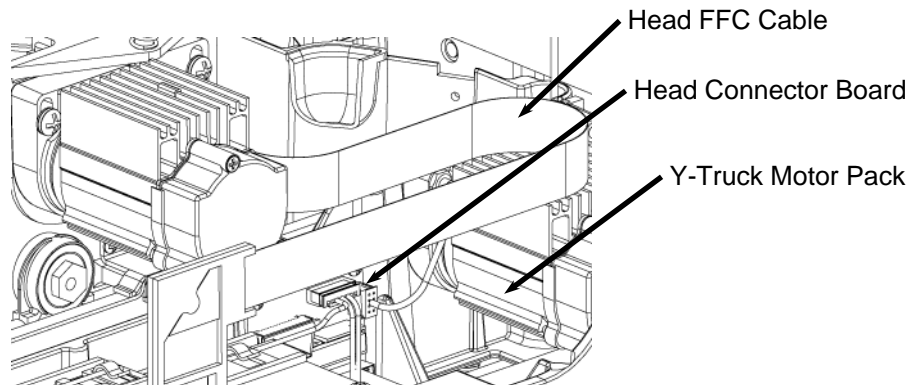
LOCATING THE HEAD CONNECTOR BOARD
